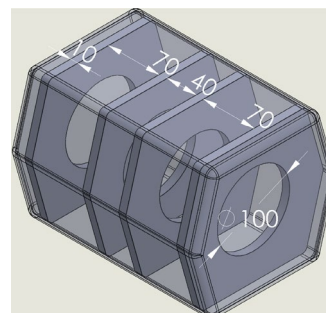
Dimensions of Tank 2 (all dimensions are in mm).
